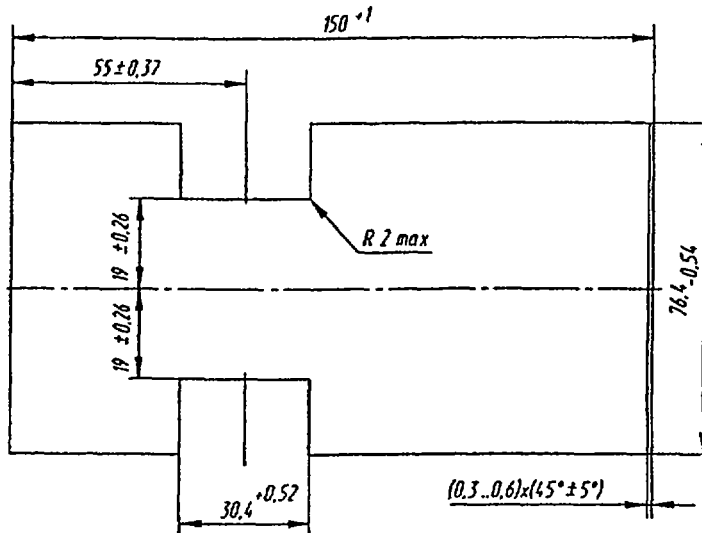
Shape and dimensions of Hf-plates arranged in butt-joint test simulator of regular advanced CFA VVER-440
